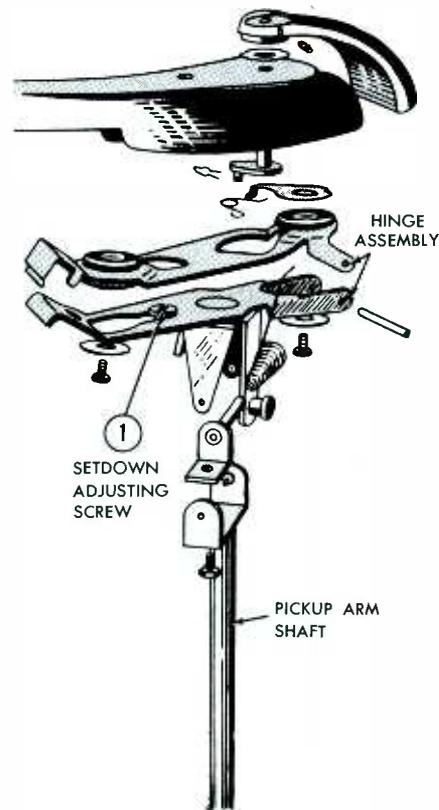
Tone Arm and Hinge Assembly of the Webster-Chicago 356.
